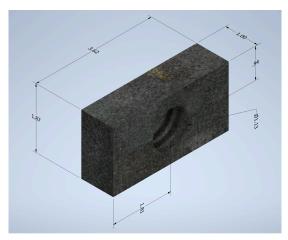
Power Screw Platform. Inventor Drawing by Lydia Miller and Jacob Schwartz. All dimensions are in inches. The inside edges of the hole are fit to the lead screw.
